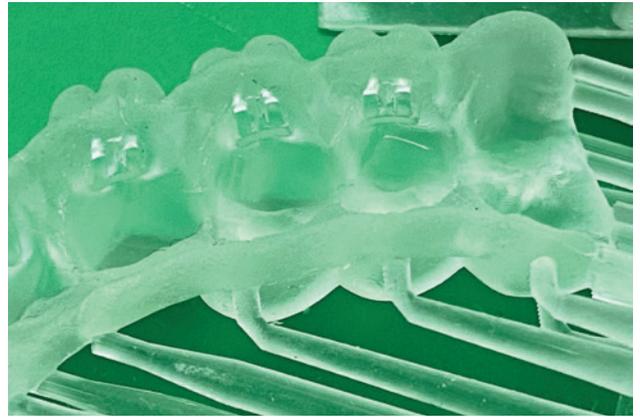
Closeup view of printed tray with proprietary slot for bracket.
